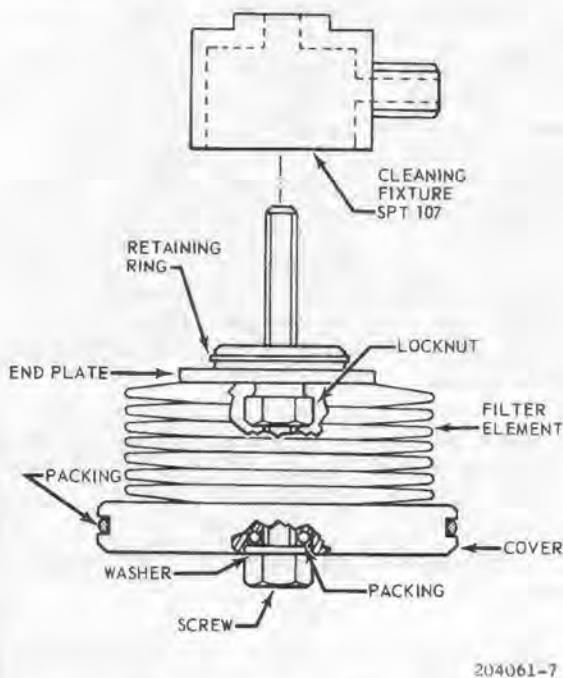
Engine oil filter, cover assembly and cleaning fixture — UH-1B
